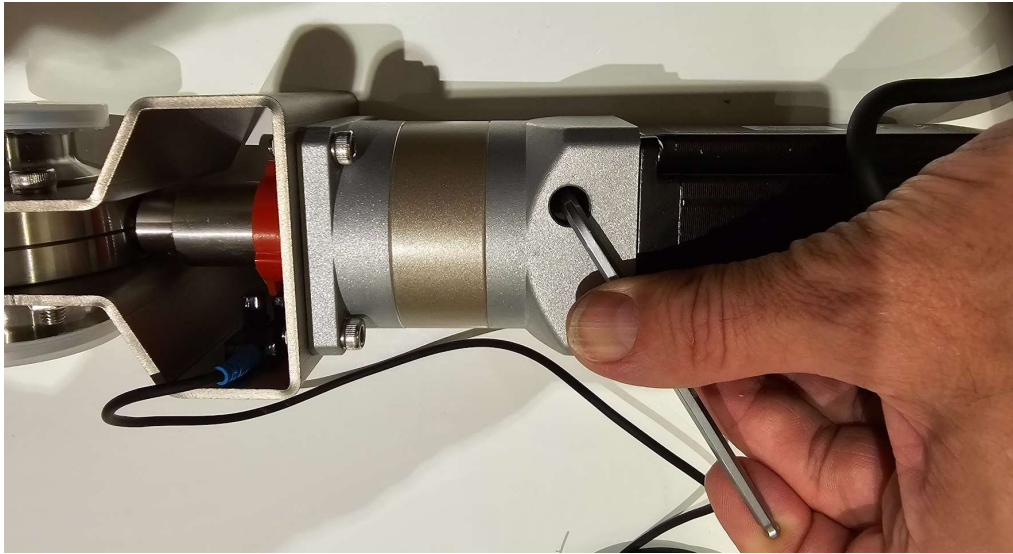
First secure the stepper to the gearbox with 4 x m4 bolts. Then tighten the shaft coupler bolts, a bit at the time, symmetrically on each side. Torque spec is 8.7Nm (6.4 lb ft). Fit the caps to the screw holes to keep water/dirt out
